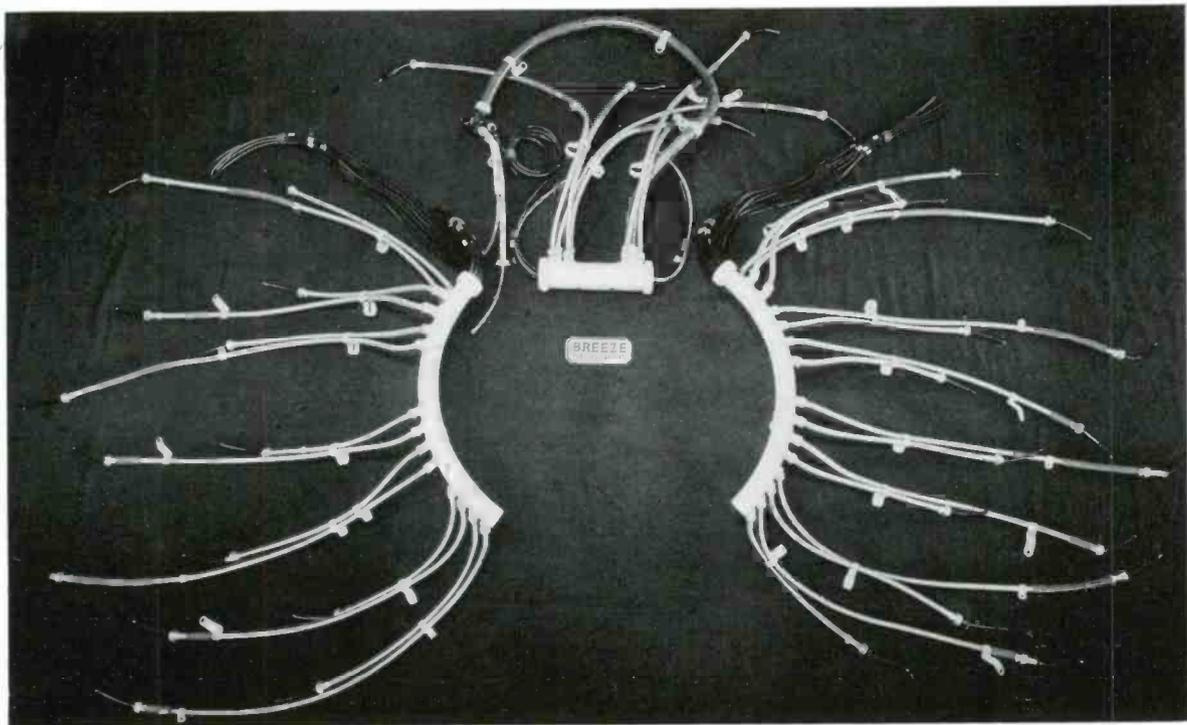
SHIELDING HARNESS FOR THE 2,000 H.P. WRIGHT CYCLONE AIRCRAFT ENGINE. CLAMPS ARE SHOWN IN PLACE ON THE CABLES
